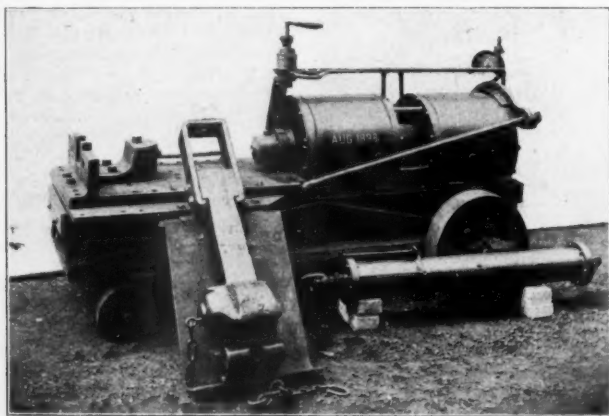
PNEUMATIC RIVETING ON DRAWBAR POCKETS.
